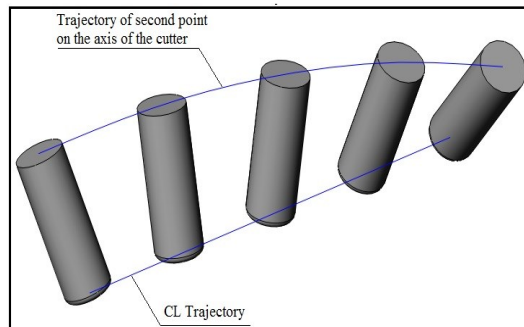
Torus end mill cutter moving through space along CL trajectory.
